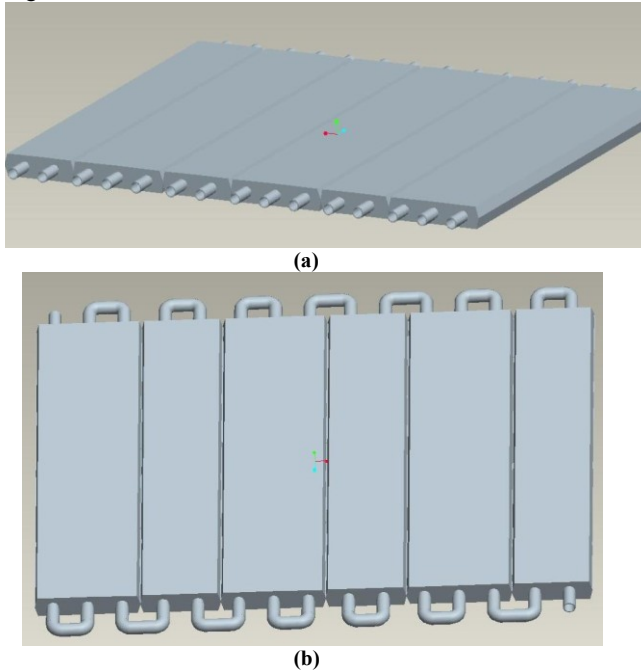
modular absorber design (a) Isometric view and (b) top view
